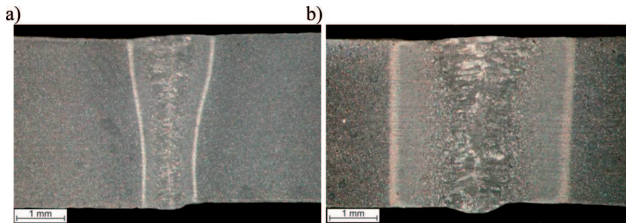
Macrographs of the cross-section of butt joints produced at the heat input of: a) 60 J/mm; b) 120 J/mm (Table 2)
